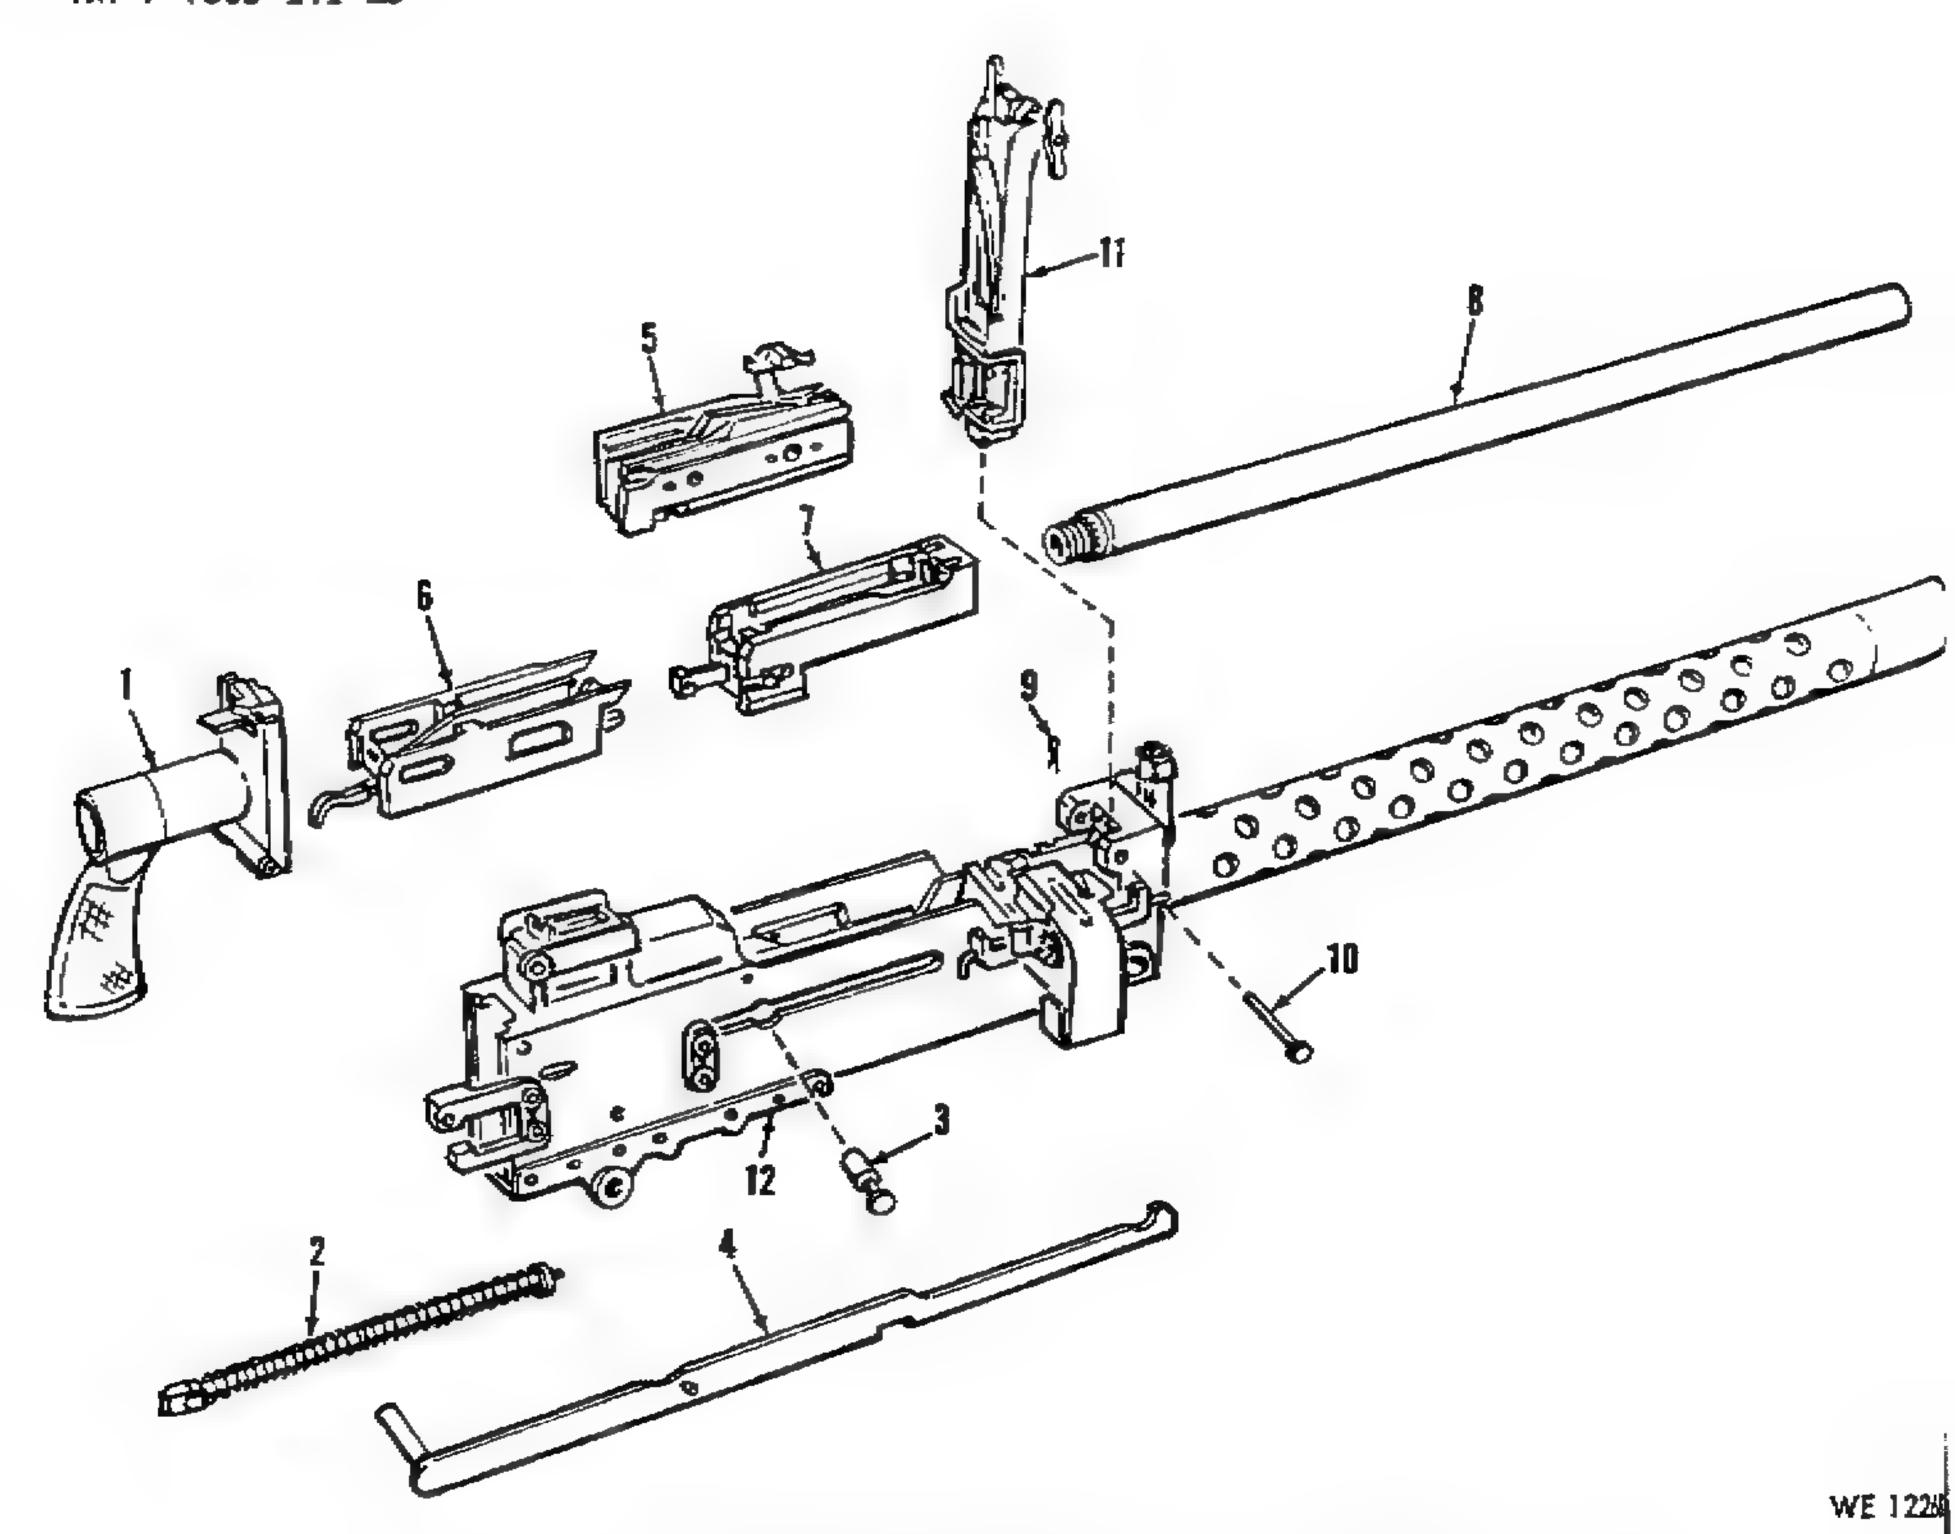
Caliber .30 Machine Gun, M37—major groups and assemblies—partial exploded view.
